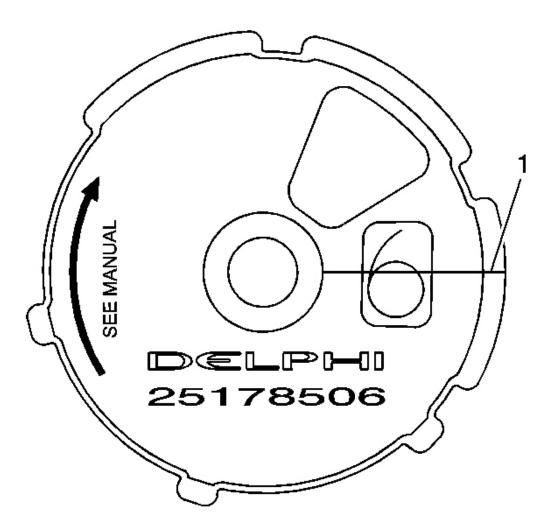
View Of Camshaft Position (CMP) Actuator Full Advanced Position Courtesy of GENERAL MOTORS CORP.
